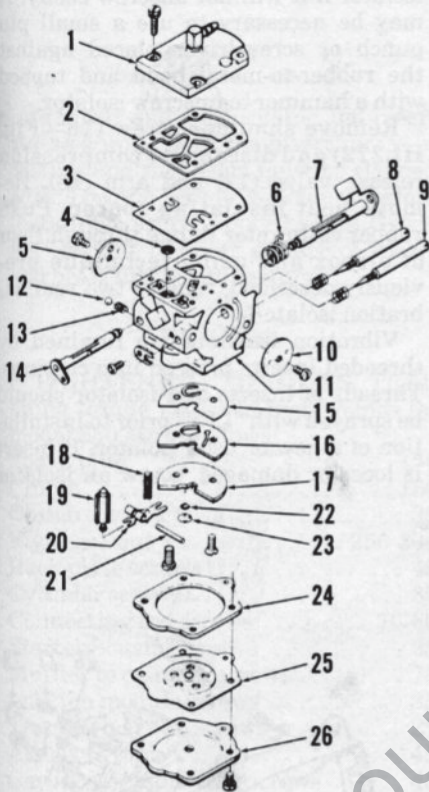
Exploded view of Walbro WB-2 carburetor used on model 650.
